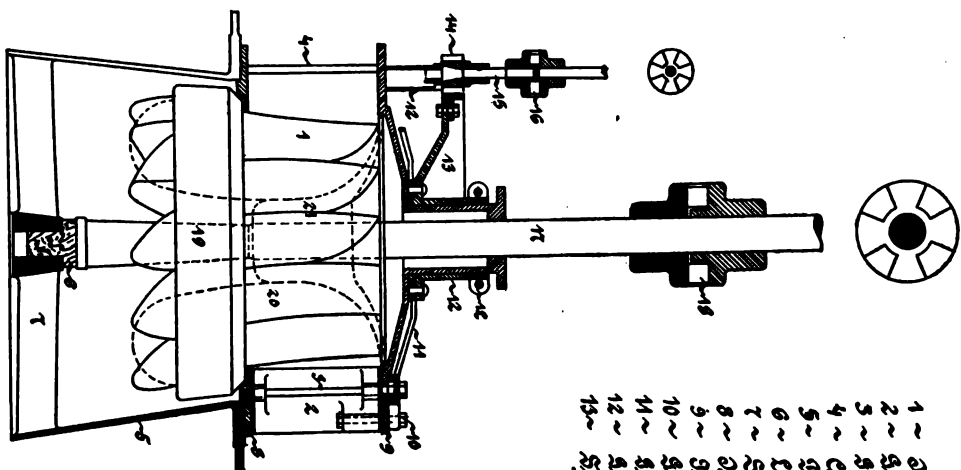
is the complete plan of an American, mixed-flow, wicket-gate turbine, in which
